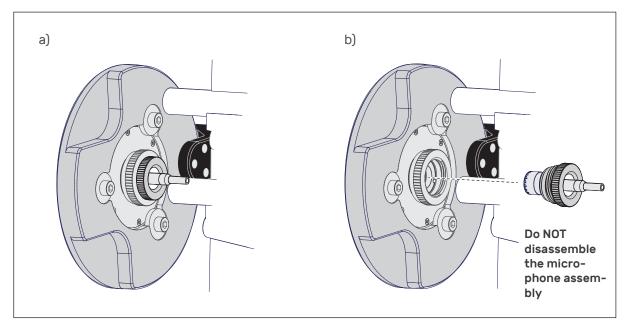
Removing a microphone assembly for calibration. When removed from the assembly (b), it is ready for calibration.
